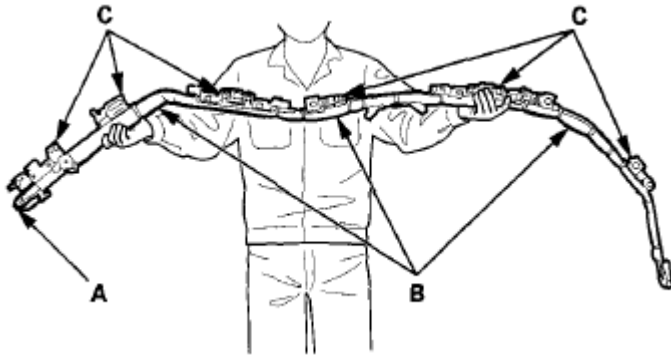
Identifying Side Curtain Airbag Module Assembly (Inflator, Flexible Bag And Brackets) - 4-Door
